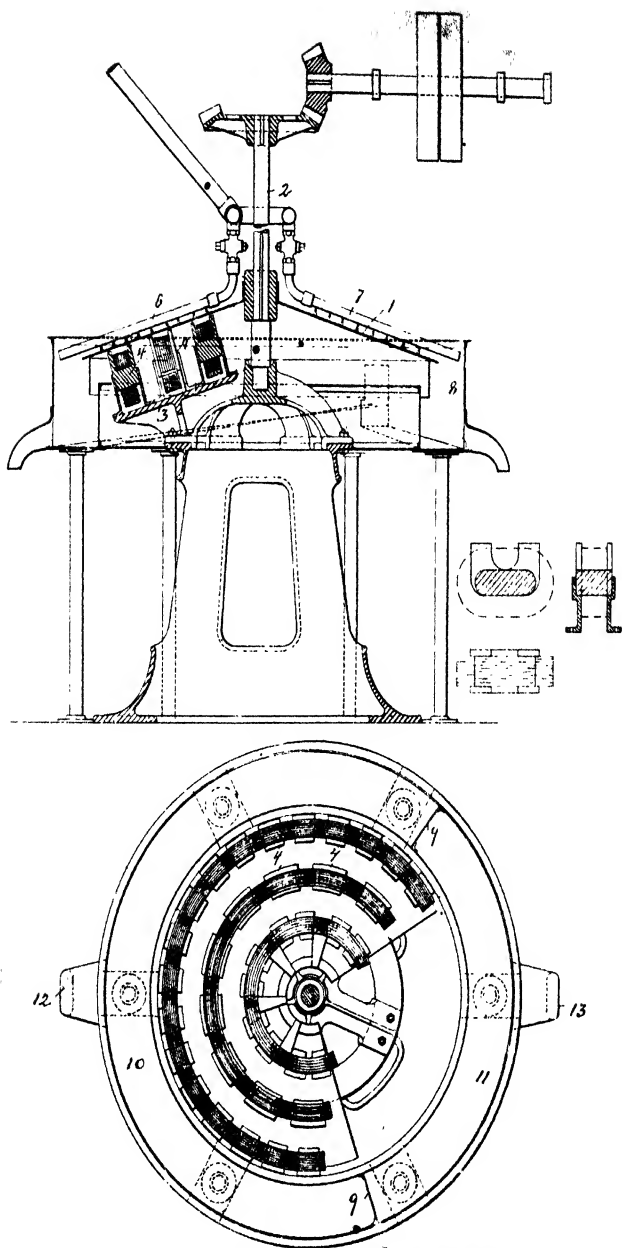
Fröding separator. Earlier type. Plan and elevation.
